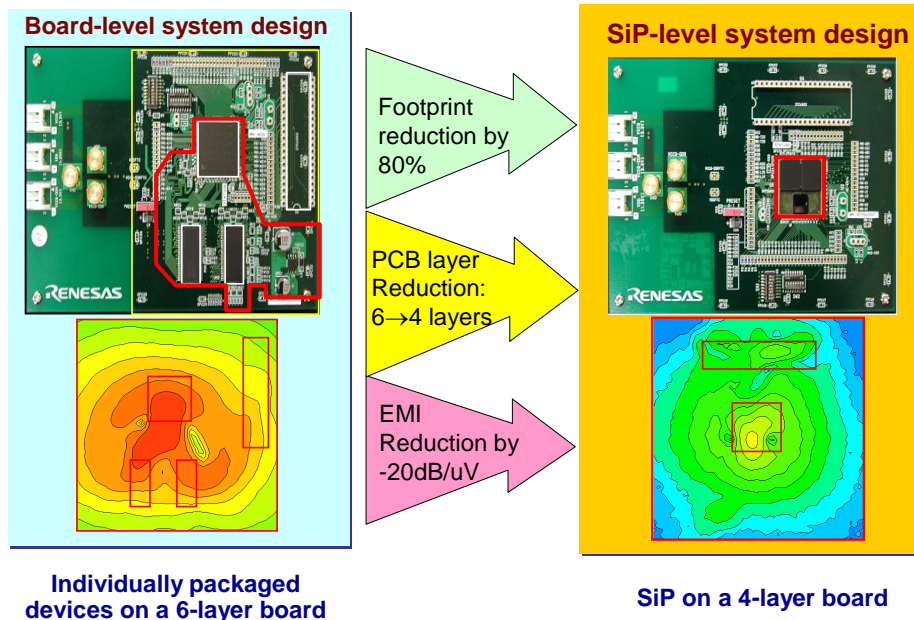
SiP Design Improves Footprint, Reduces PCB Layers Reduction and Improves Performance
